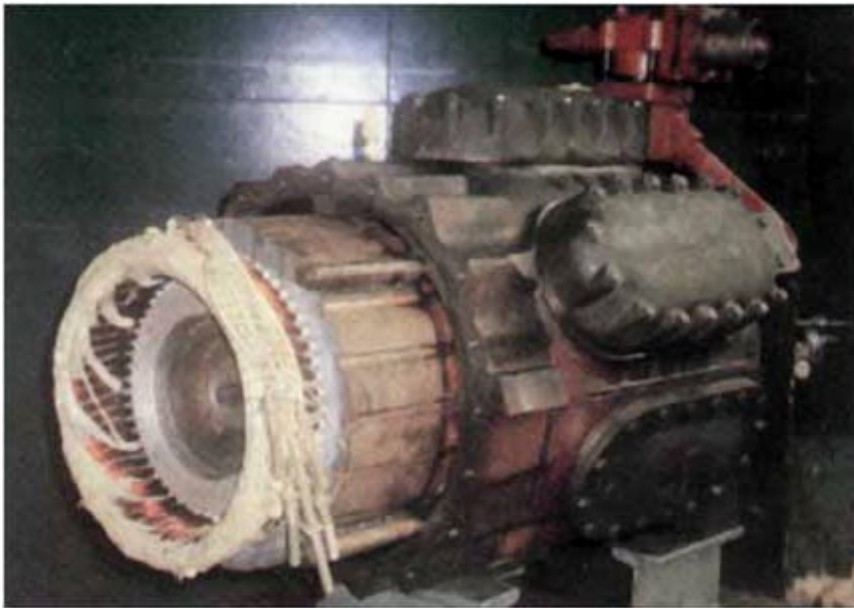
Stator and rotor assembly mounted on a 75 ton semi-hermetic compressor
